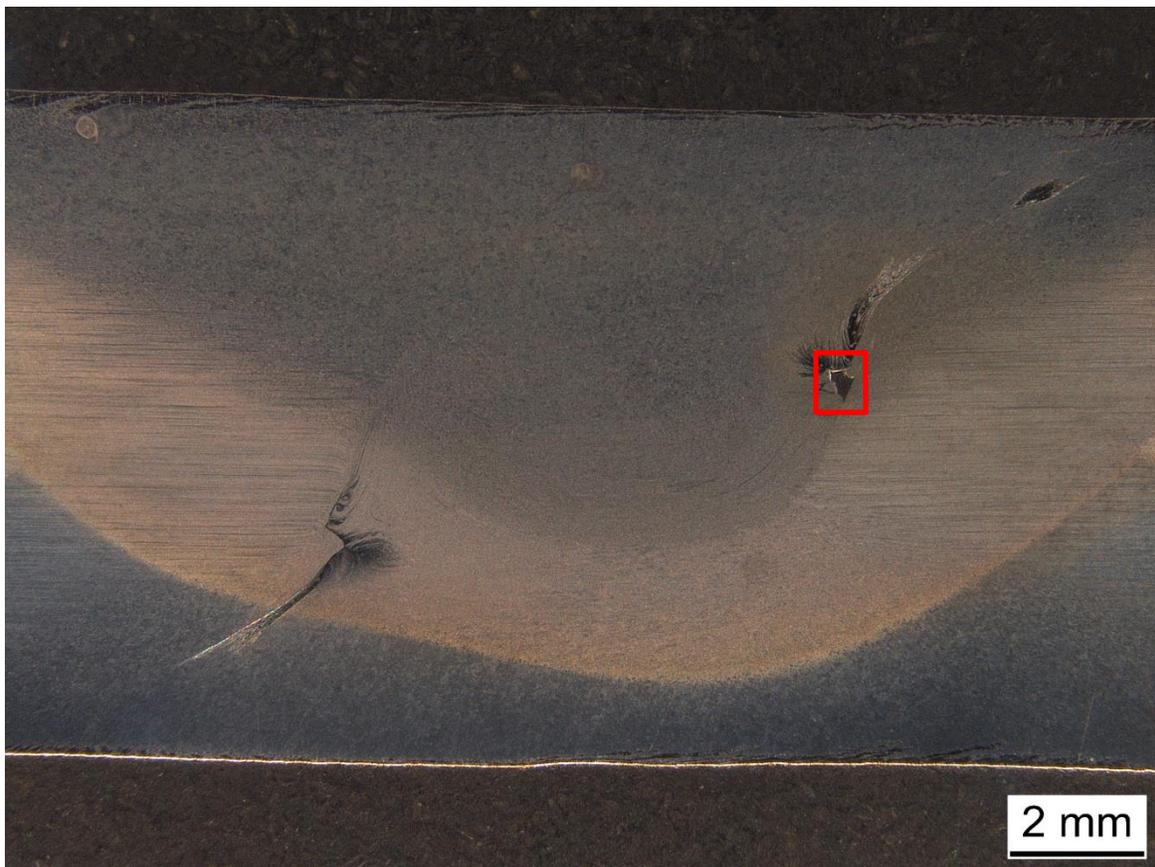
Defect, boxed in red, found near the end of a double pass weld. Note the large HAZ when compared to Figure 13.
